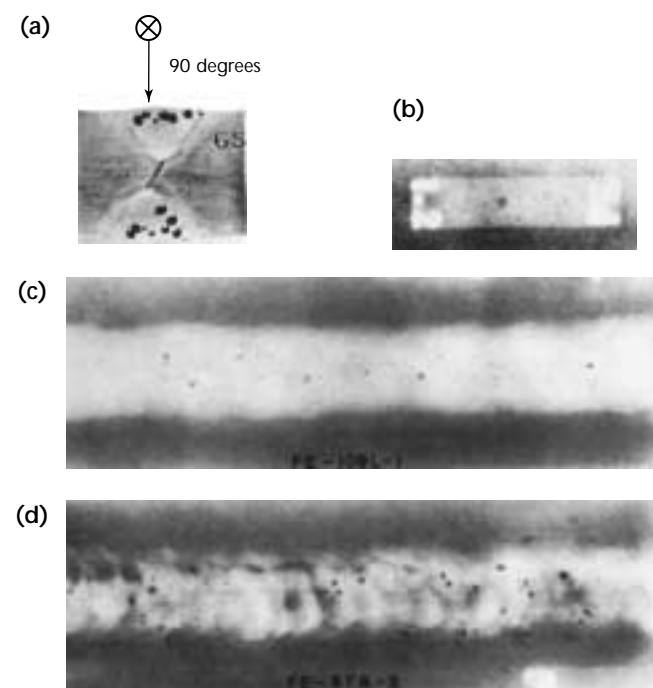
Examples of ungraded conditions correlated with weld cross sections in aluminum welds: (a) plate separation, appearing similar to incomplete penetration; (b) wire inclusion trapped during cleaning operation.<sup>24</sup>
